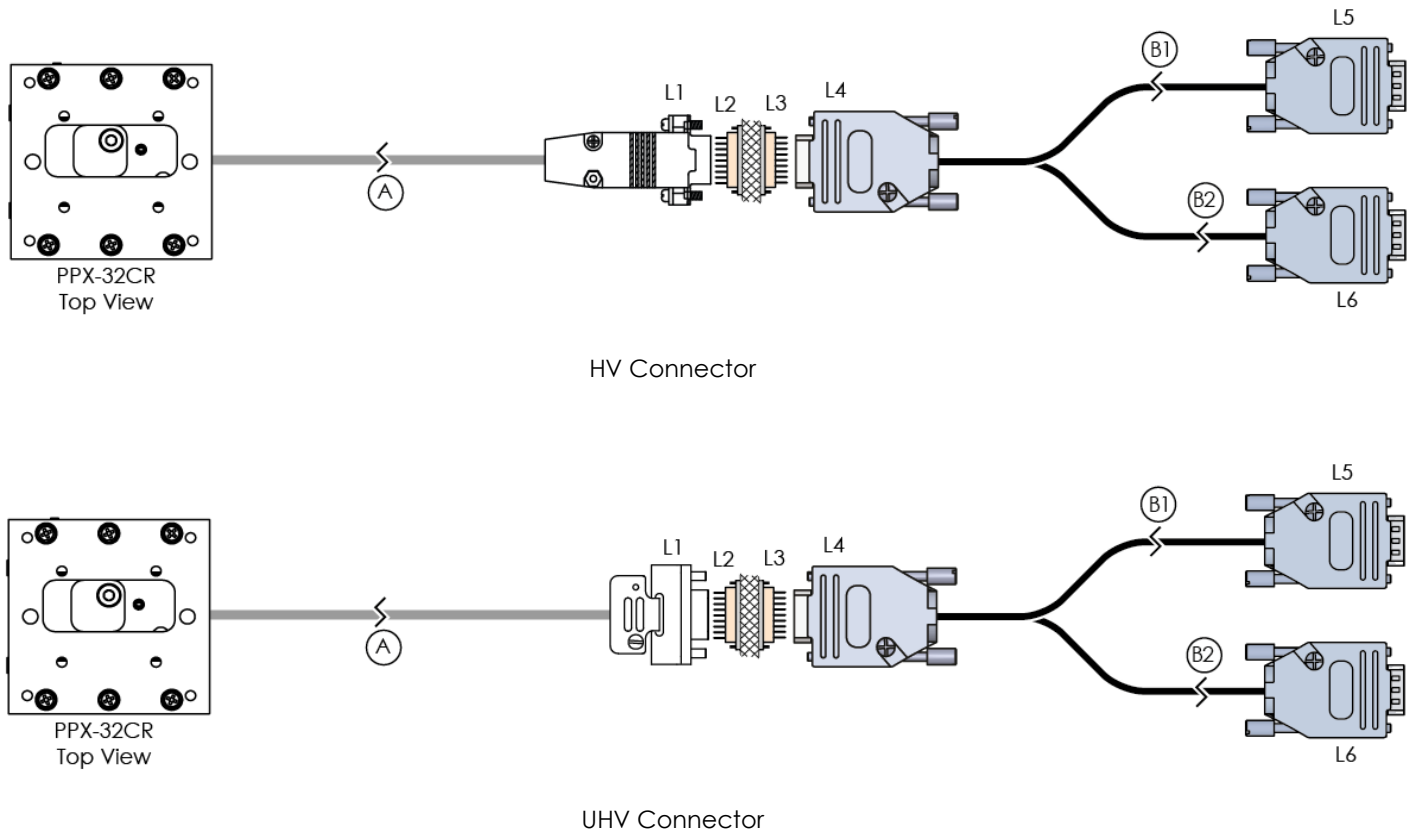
C. PPX-32CR, Piezo Motor, Open Loop, Vacuum Wiring Diagram
